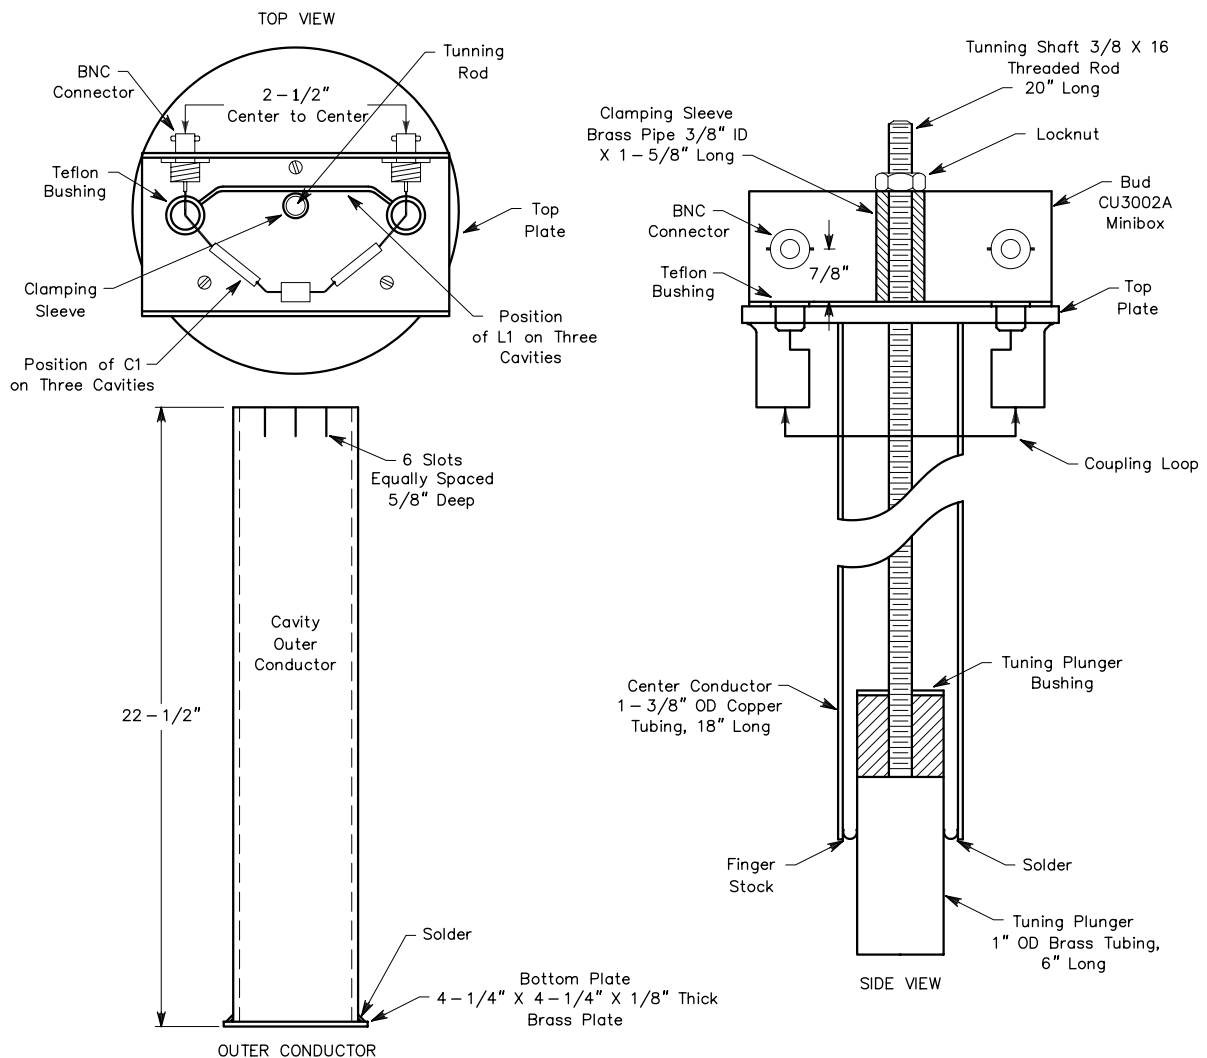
The assembly of an individual cavity. A Bud Minibox is mounted on the top plate with three screws. A clamping sleeve made of brass pipe is used to prevent crushing the box when the locknut is tightened on the tuning shaft. Note that the positions of both C1 and L1 are shown, but that three cavities will have C1 installed and three will have L1 in place.
